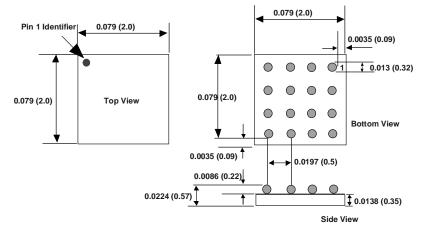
Outline Dimension [WLCSP] (CB-16) Dimensions shown in inches (millimeters)
